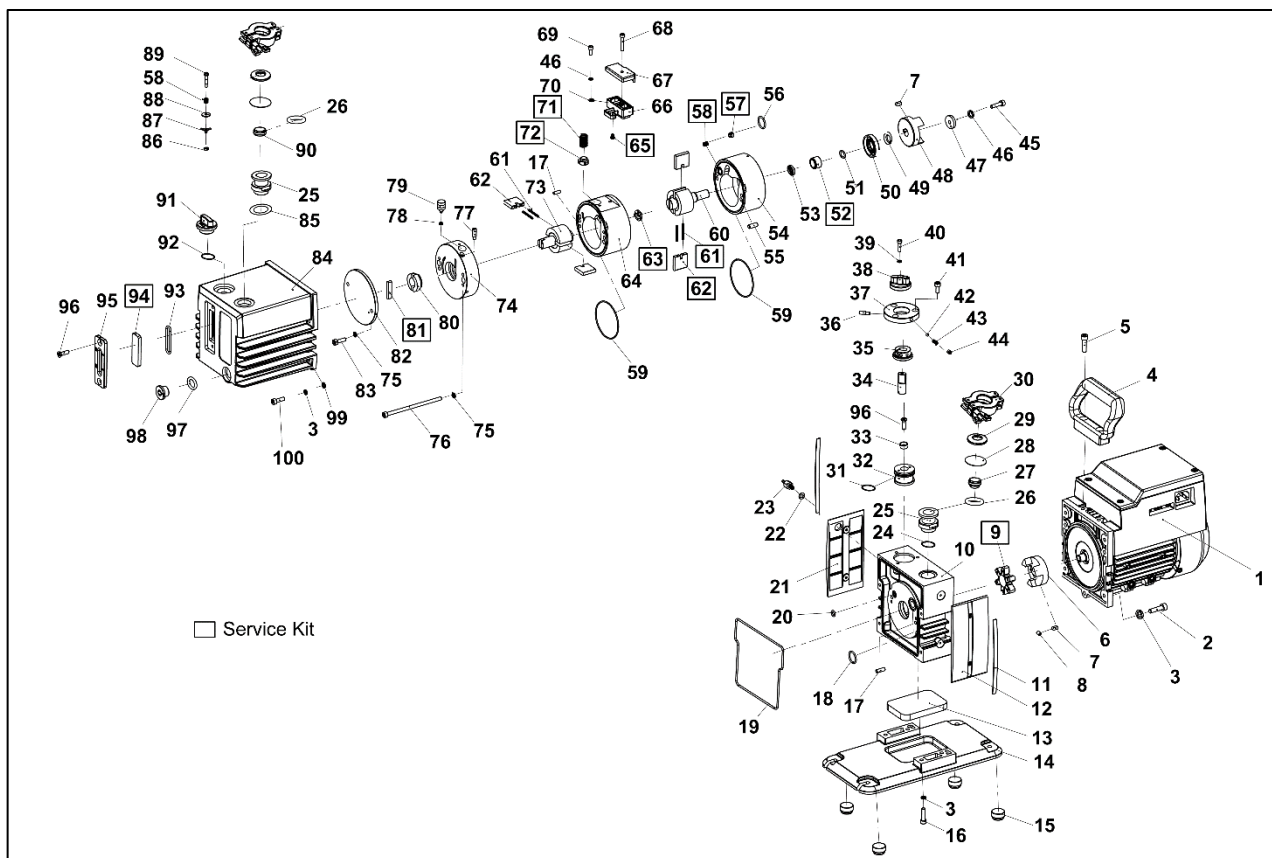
Explosion view - Rotary vane pump with service kit – positions (RV2.5+)
